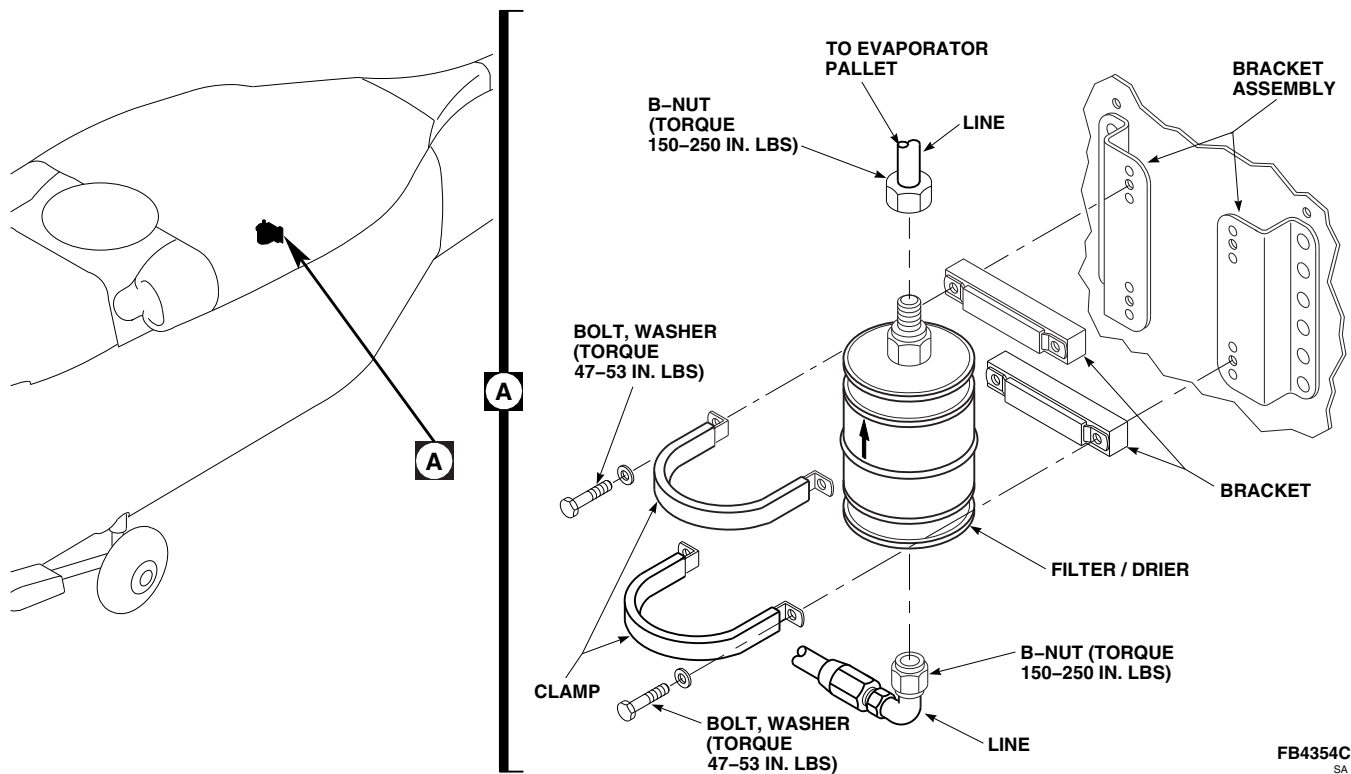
REPLACE ENVIRONMENTAL CONTROL SYSTEM FILTER/DRYER
